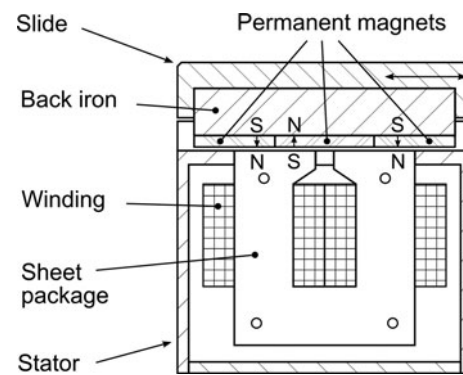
Schematic cross-sectional view of the cube-shaped feed unit
